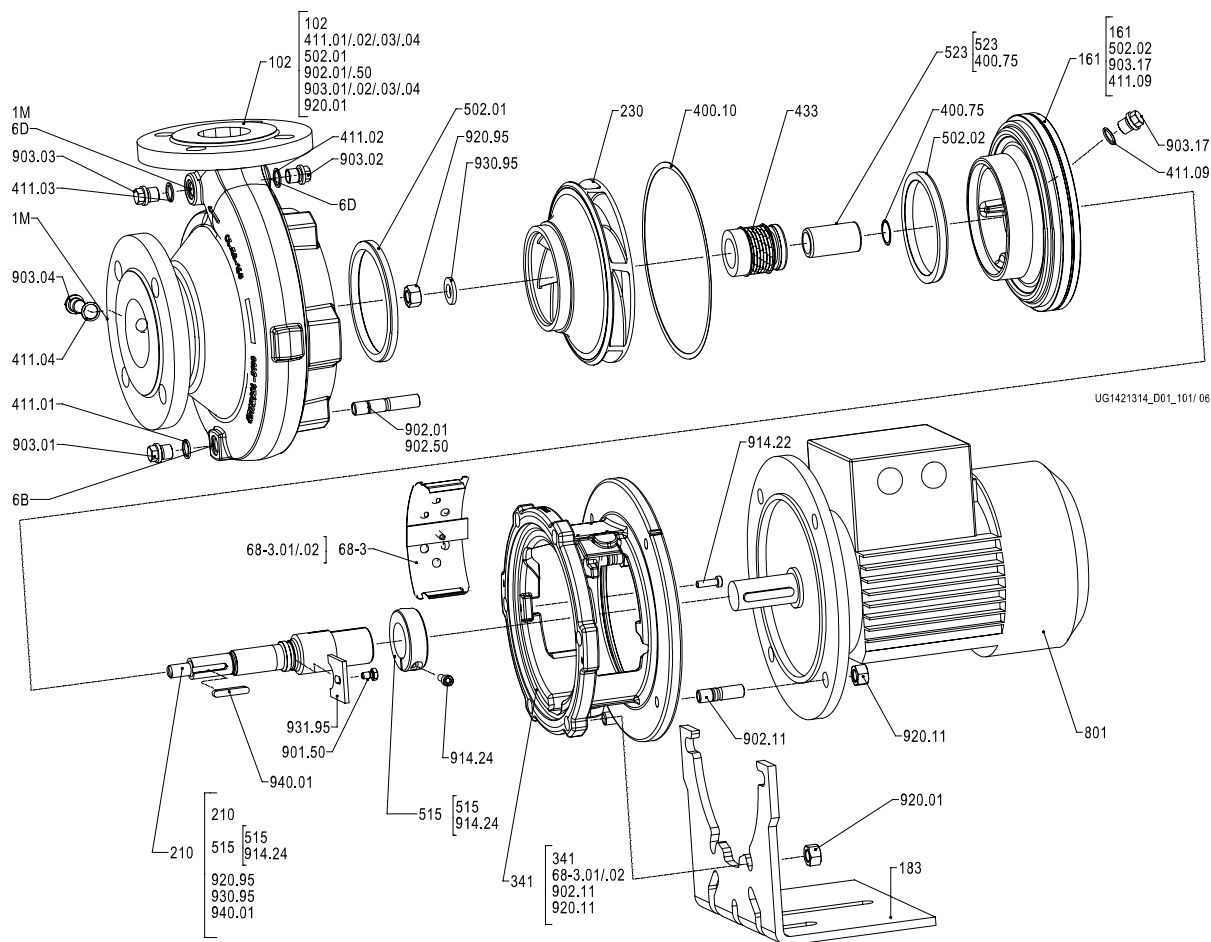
Version with single mechanical seal and clamped casing cover, without pump foot
